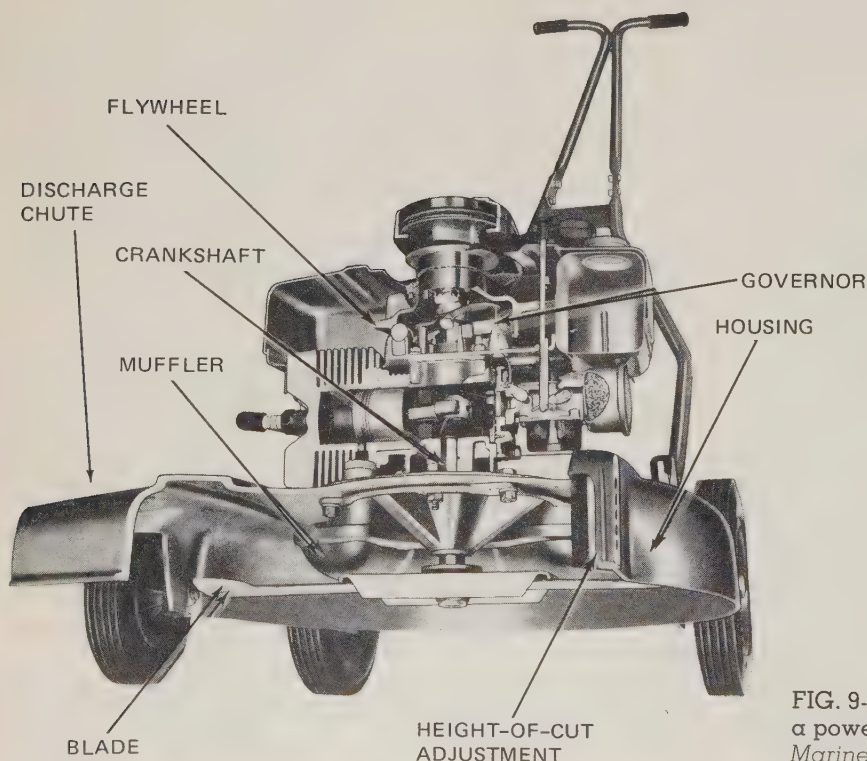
Cutaway view of a two-cycle engine used in a power lawn mower. (Lawn Boy Division of Outboard Marine Corporation)
